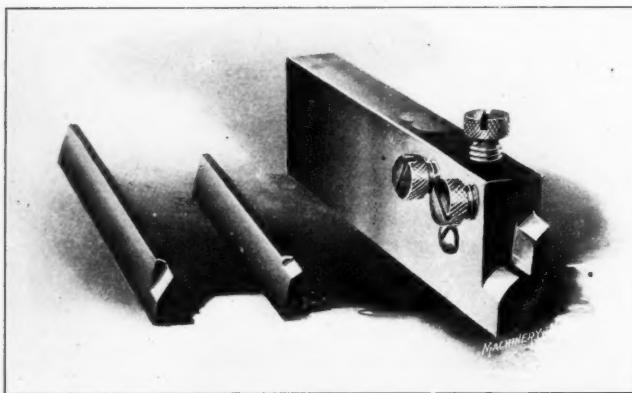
No-clearance Tool for Standard Engine Lathe Tool-post, showing Three Cutters of Different Angles.
